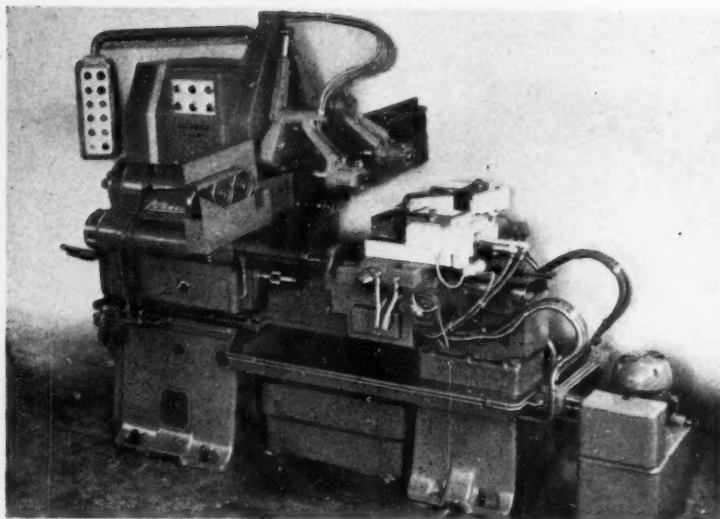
Maxново Automax-22 hydraulic multitool lathe equipped with a Facomax work handling unit
